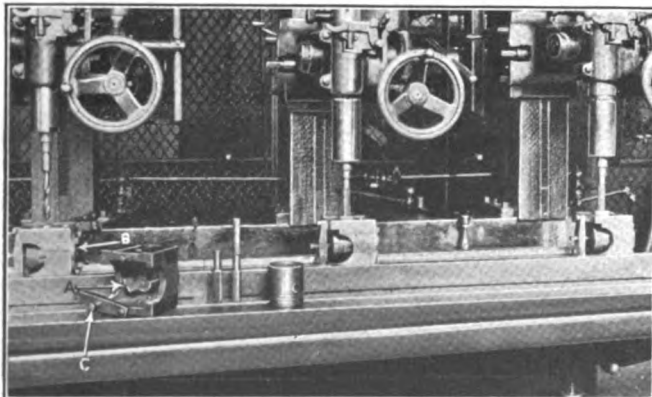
DRILLING AND REAMING THE PIN HOLE
